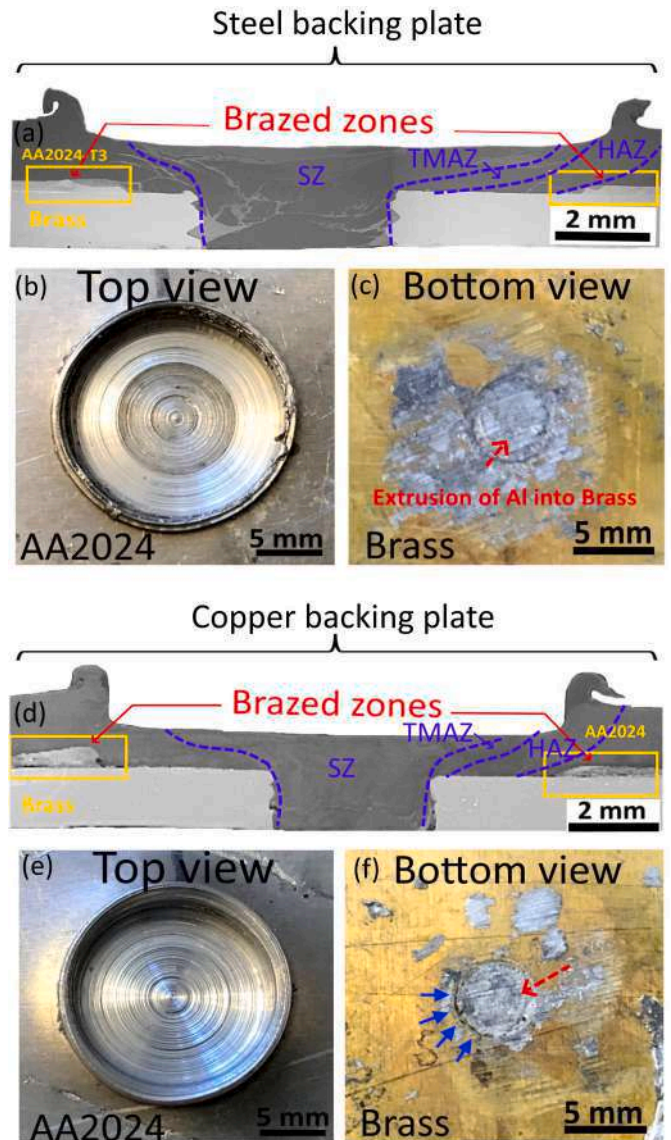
FESEM cross-sectional images and surface appearance of the weld made by various backing plate materials, (a) cross-section, (b) top view, and (c) back view of weld with steel backing plate, while (d) cross-section, (e) top view, (f) back view of weld with copper backing plate. (For interpretation of the references to color in this figure, the reader is referred to the web version of this article.)
